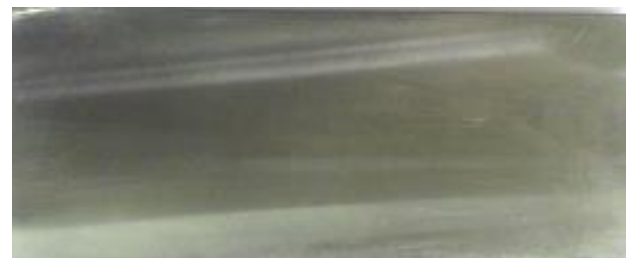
backing plate (200X100X8 mm) used in FSW process
